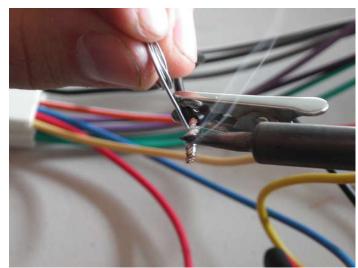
Here Mitch is soldering a wiring harness for a car stereo - just one of the infinite uses for soldering.
